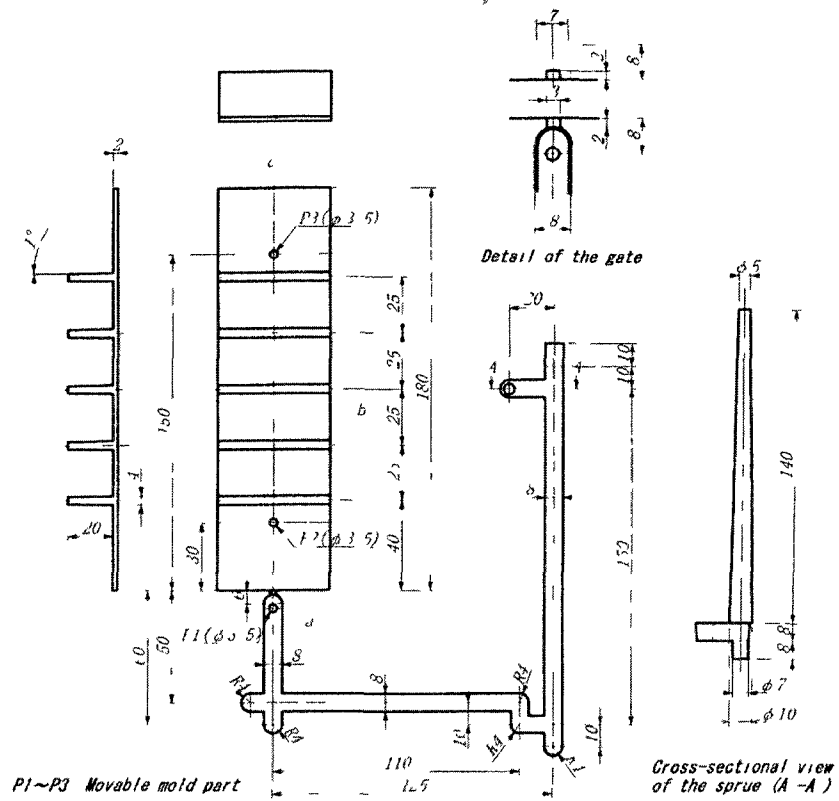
Engineering Drawing of 4 mm Perpendicular Rib Cavity
